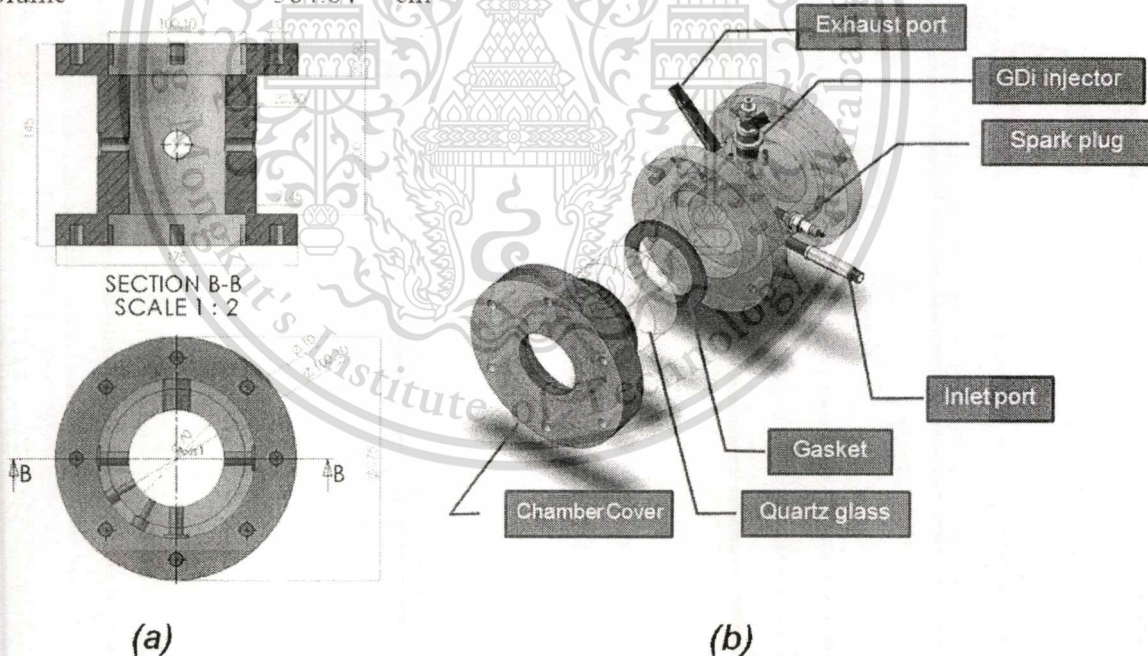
(a) Dimension of CVCC and (b) Assembly view of CVCC.
